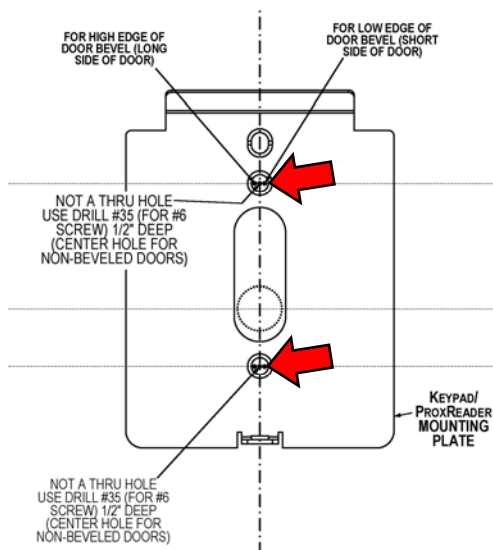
A: DRILL $\frac{7}{64}$ " PILOT HOLES FOR MOUNTING THE KEYPAD/PROXREADER
